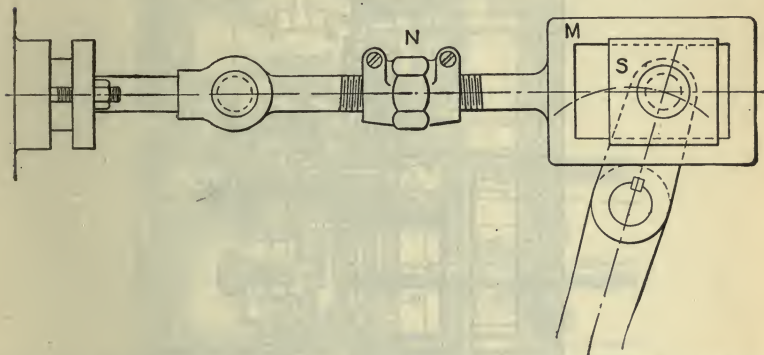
Lost motion arrangement consisting of yoke M, and block S, pivoted at the rocker end. In this design the lost motion cannot be changed without altering the length of the block S, but the length of the valve stem can be adjusted by means of the sleeve nut N.
